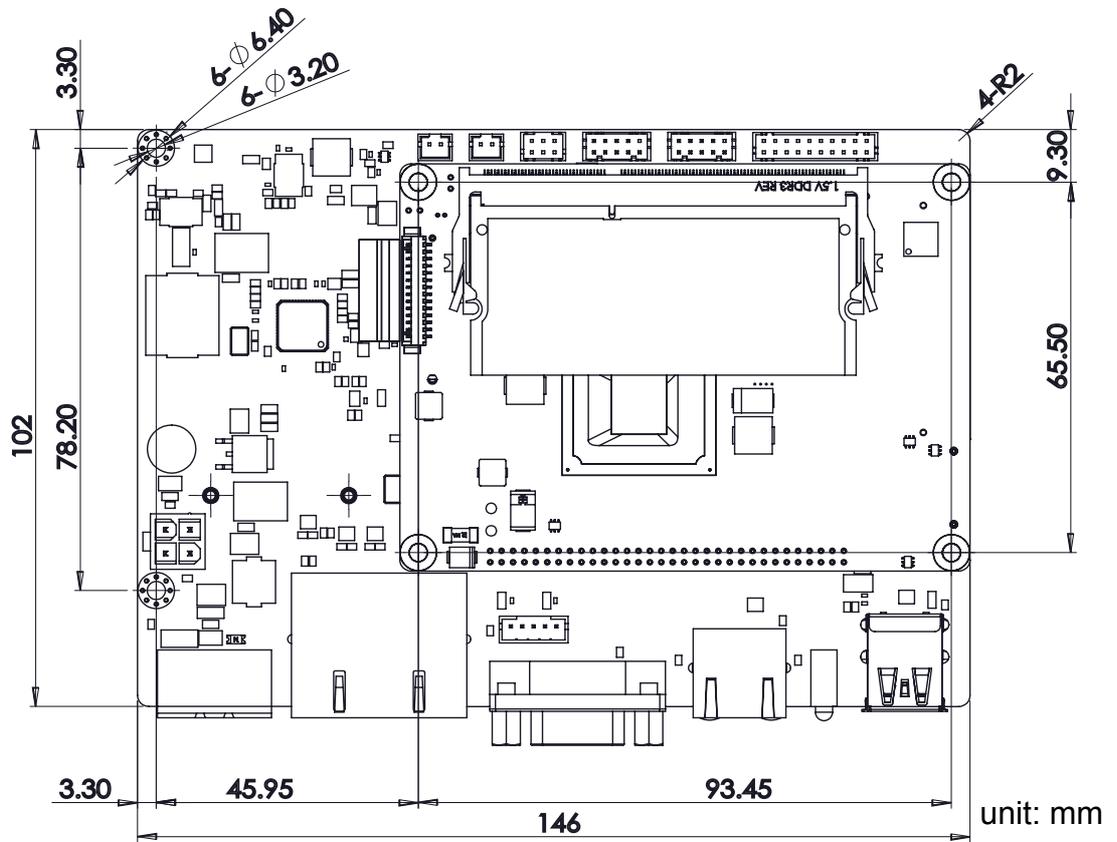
MIO-6300 Mechanical Drawing (Top View)
